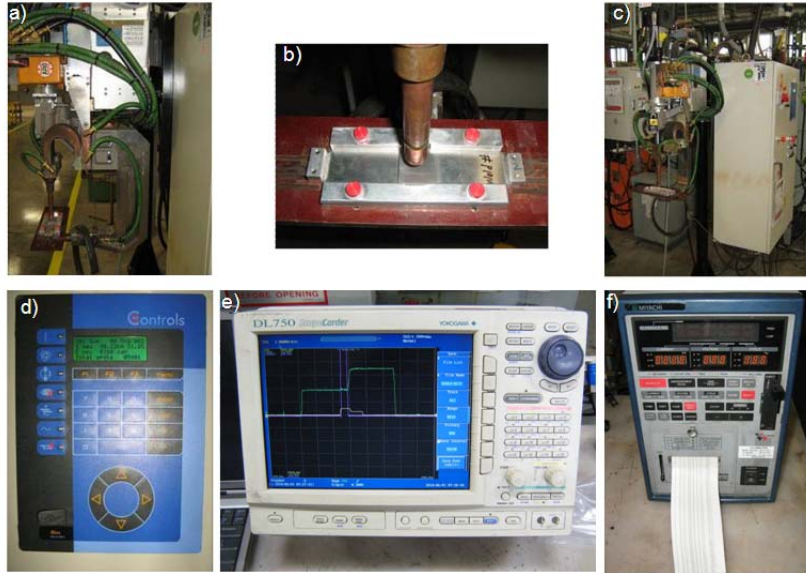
Welding equipment used to produce welds at three nugget sizes.
